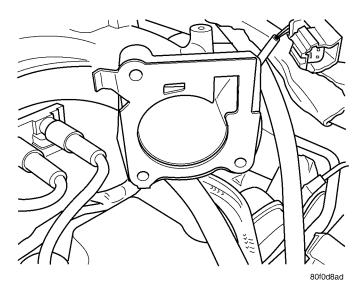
THROTTLE BODY GASKET- 2.4L TURBO INSTALLATION
